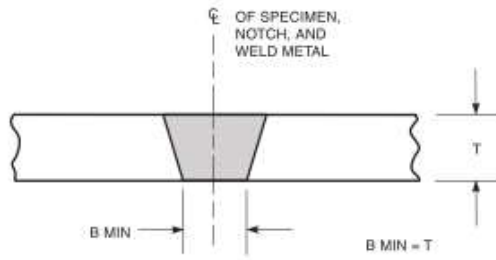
7—Recommended Ratio of Weld Metal to Specimen Thickness for Weld-Metal Fracture Toughness Specimen (Compact Tension Specimen)
